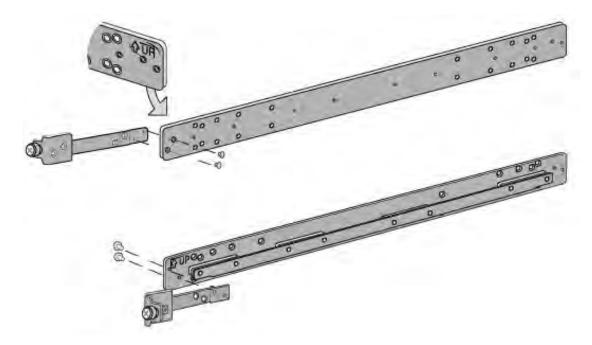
Example of Attaching the Extension Brackets to the Inner Rails
